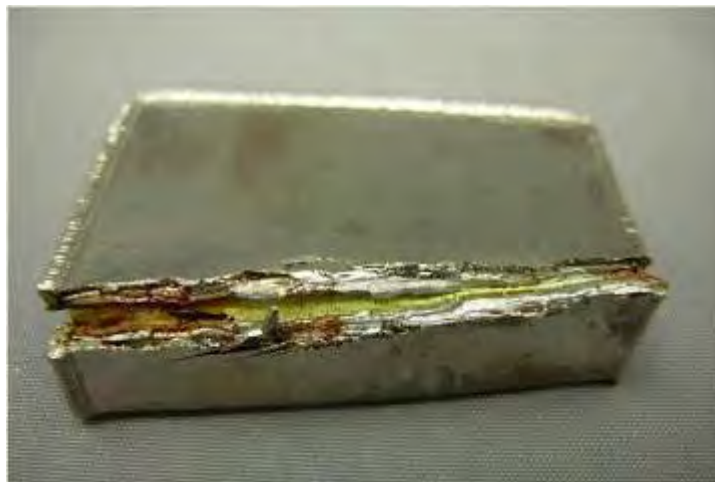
IMAGE OF THE FRACTURE SURFACE FOLLOWING BENDING.
